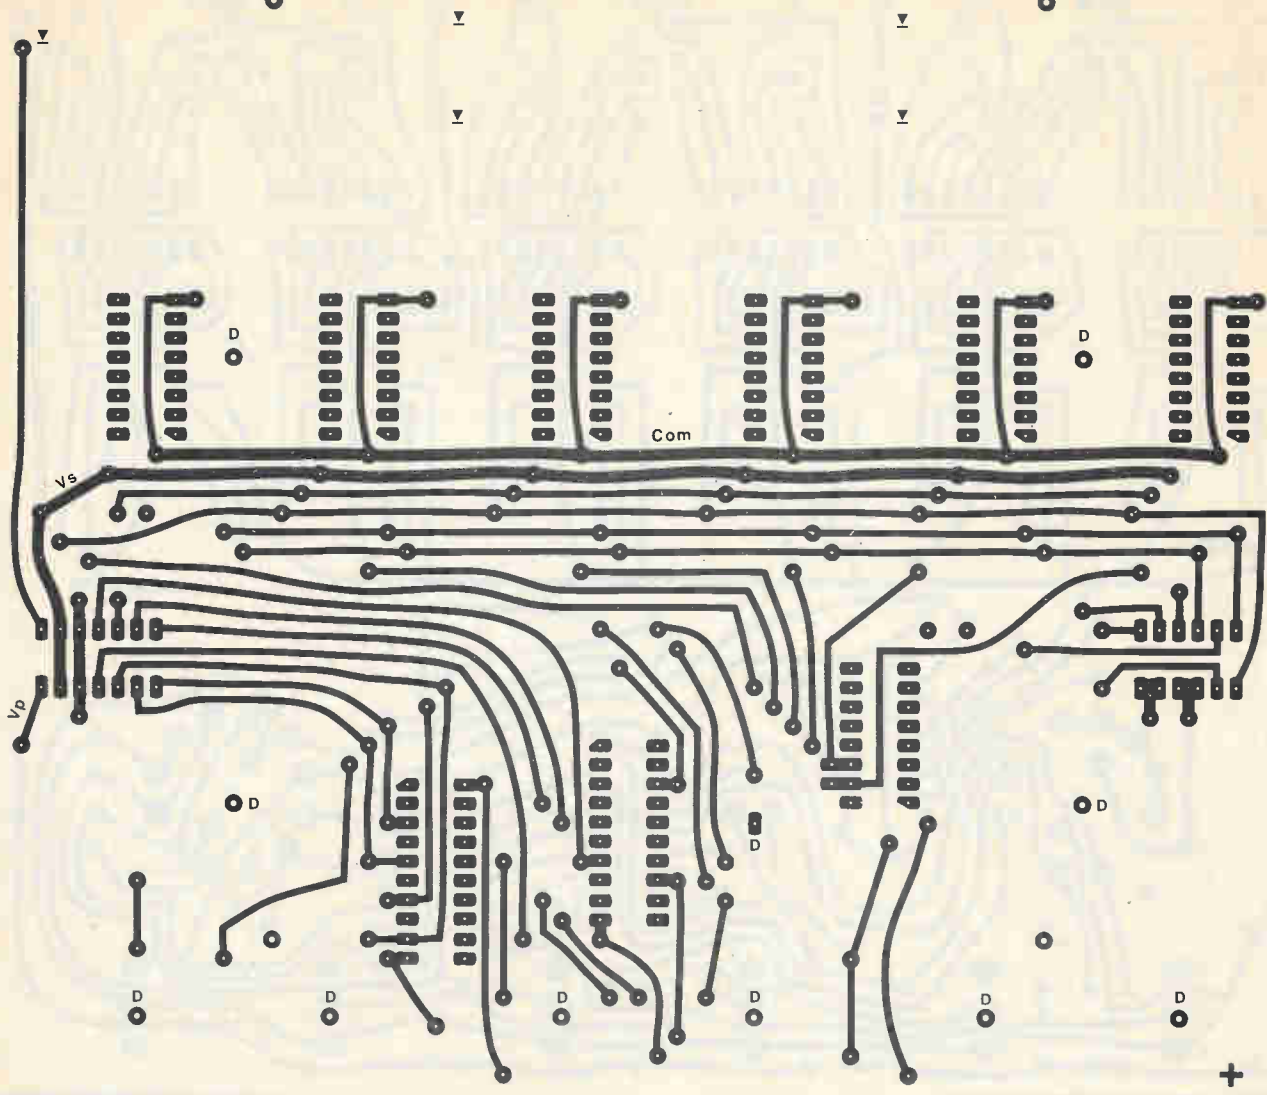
DISPLAY AND CONTROL printed-circuit board front foil pattern shown same size ready for photo-copying.
